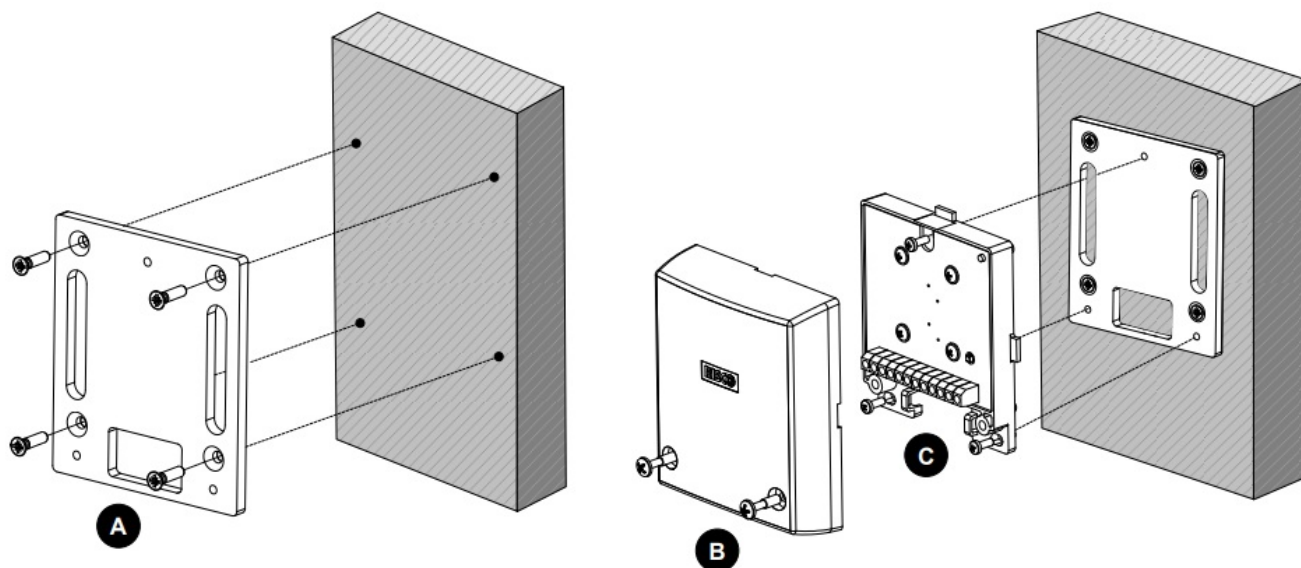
Mounting the detector using the mounting plate. (Note: Affix the mounting plate using fixing screws or optionally, by welding the plate to a metallic surface.)
